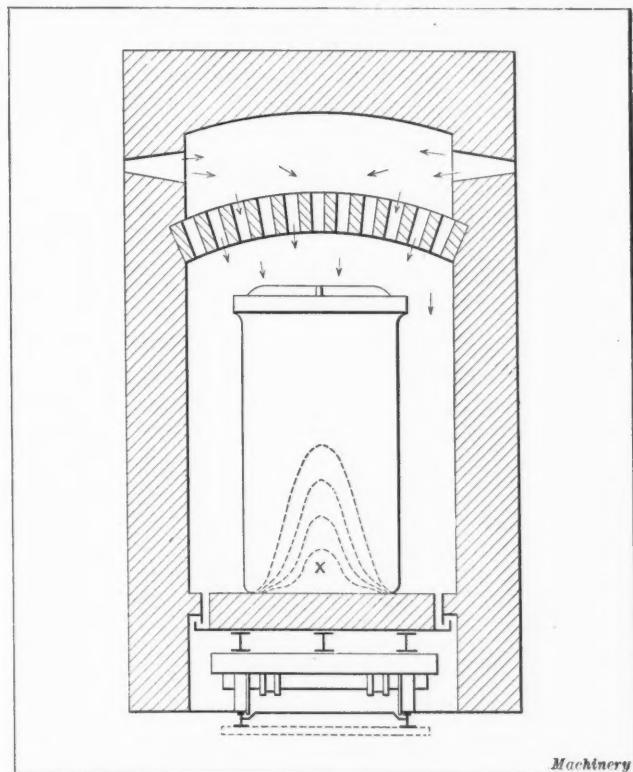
Design of Car Furnace Likely to produce a Cold Zone at Bottom of Charge
